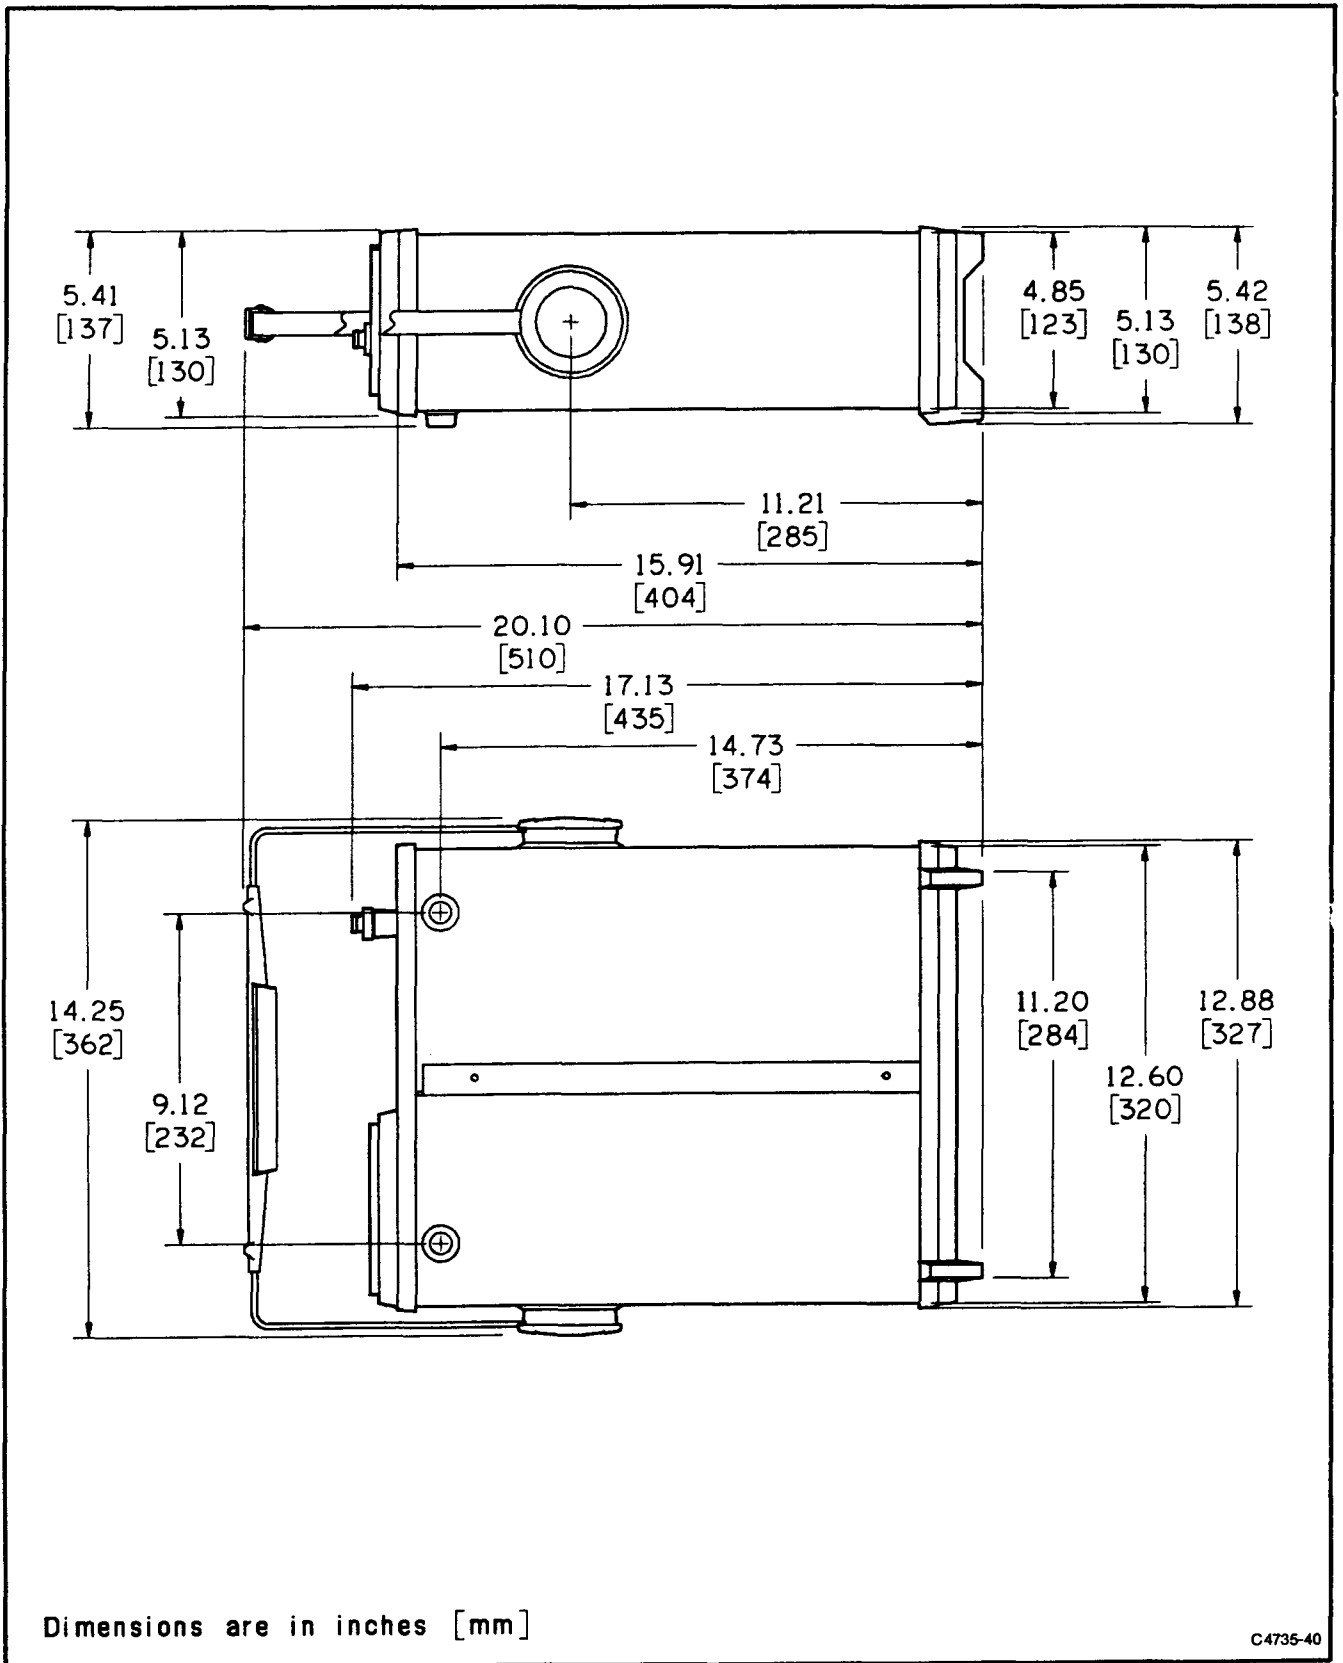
Physical dimensions of the 2236 Oscilloscope.
